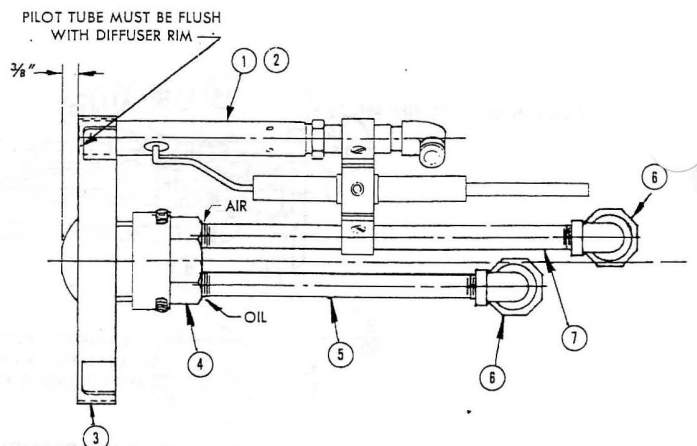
149289-G01 GUN ASSEMBLY (& PILOT) (FOR L.P. GAS, SPECIFY 149289-G02) FOR BURNERS AO - 6.3 and AO - 9.8.
